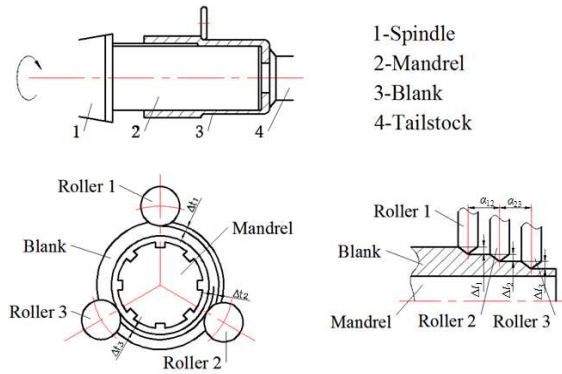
Schematic of cup-shaped inner gear spinning [40].
